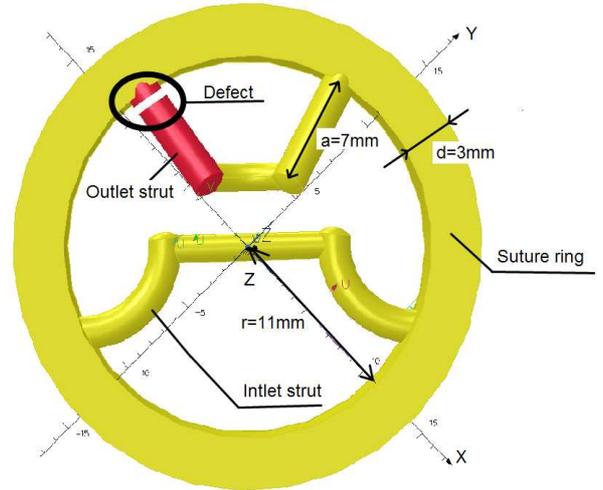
Dimensions of heart valve with defect localized on the outlet strut
